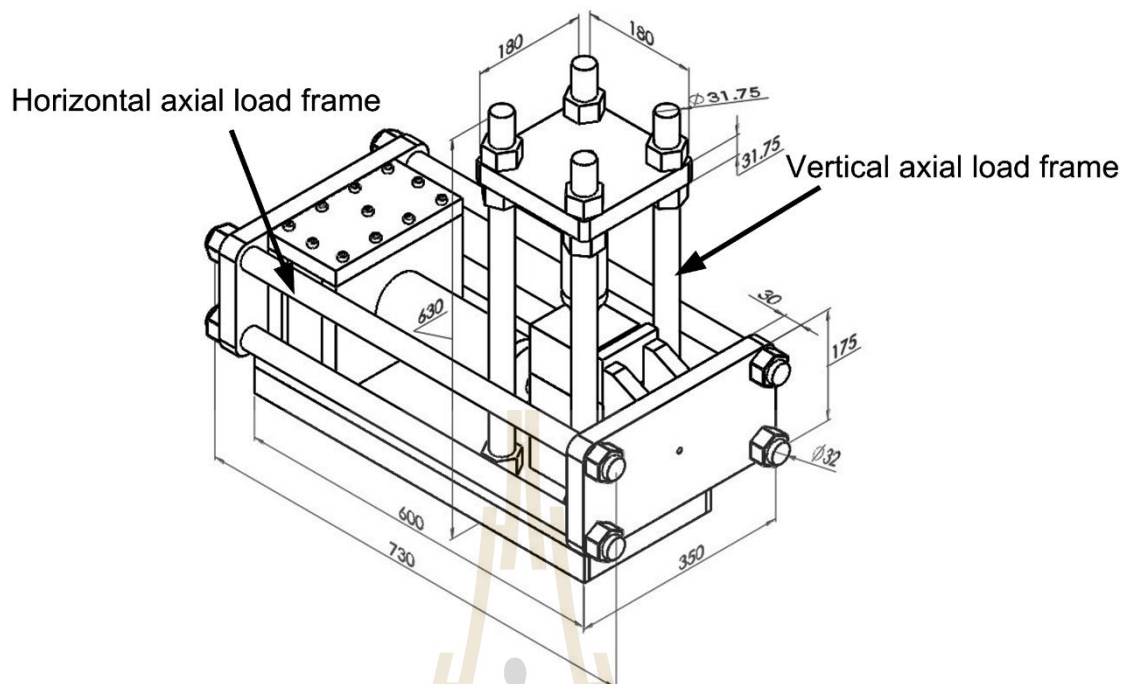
Two steel cross load frames (horizontal axial and vertical axial load frames) with dimension (mm).
